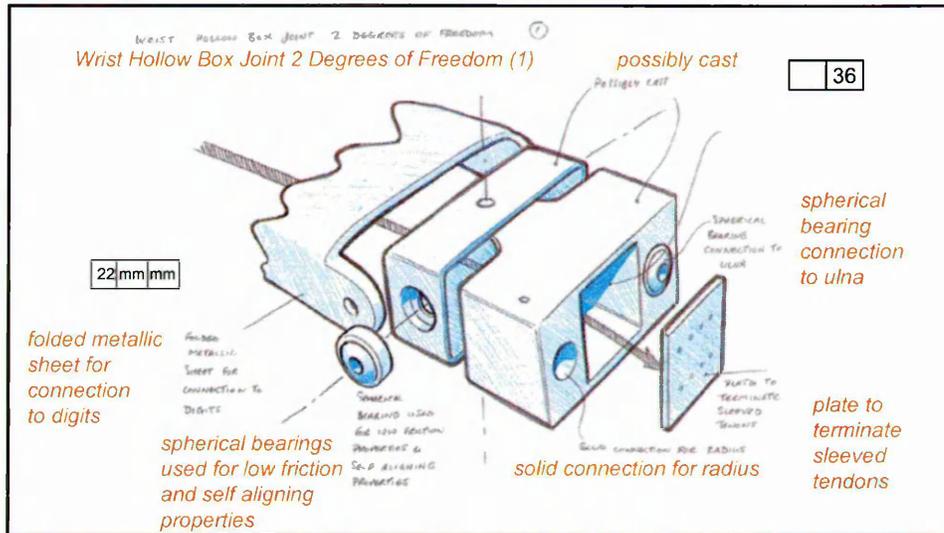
Sketch Idea for a Mechanical Solution to Wrist - Finger Coupling
